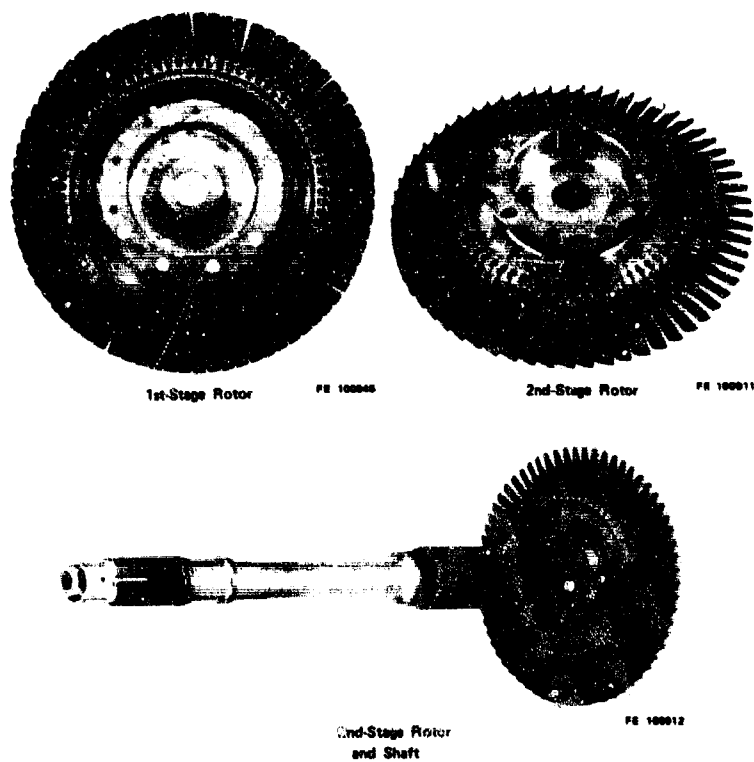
Disassembly View of Fuel Turbine Rotors Showing Good Condition
